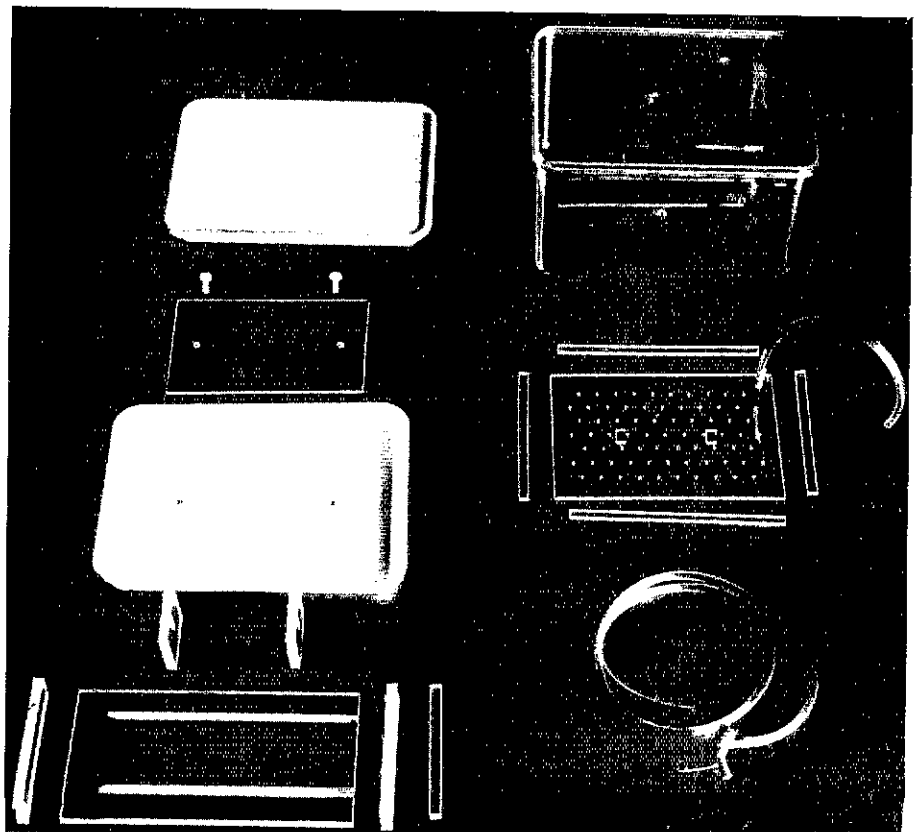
Individual parts of the bubble etcher prior to final assembly.
